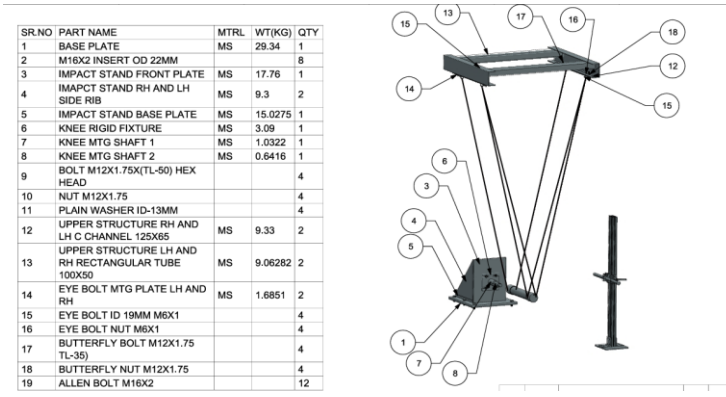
Exploded CAD view of the proposed compact dual-mode knee calibration rig showing major structural components, pendulum assembly, knee fixture, and bill of materials mapping.
